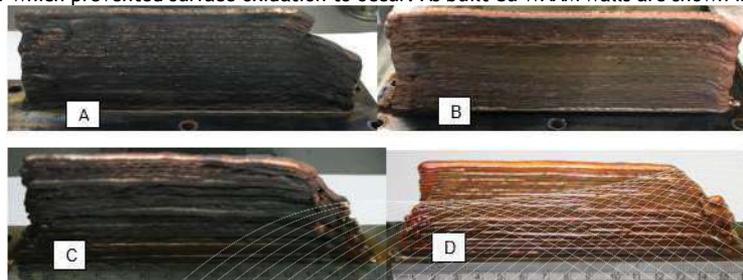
As build Cu welding & electrical WAAM walls. A - welding wire with local shielding, B welding wire with global shielding, C - electrical wire with local shielding, D electrical wire with global shielding.
